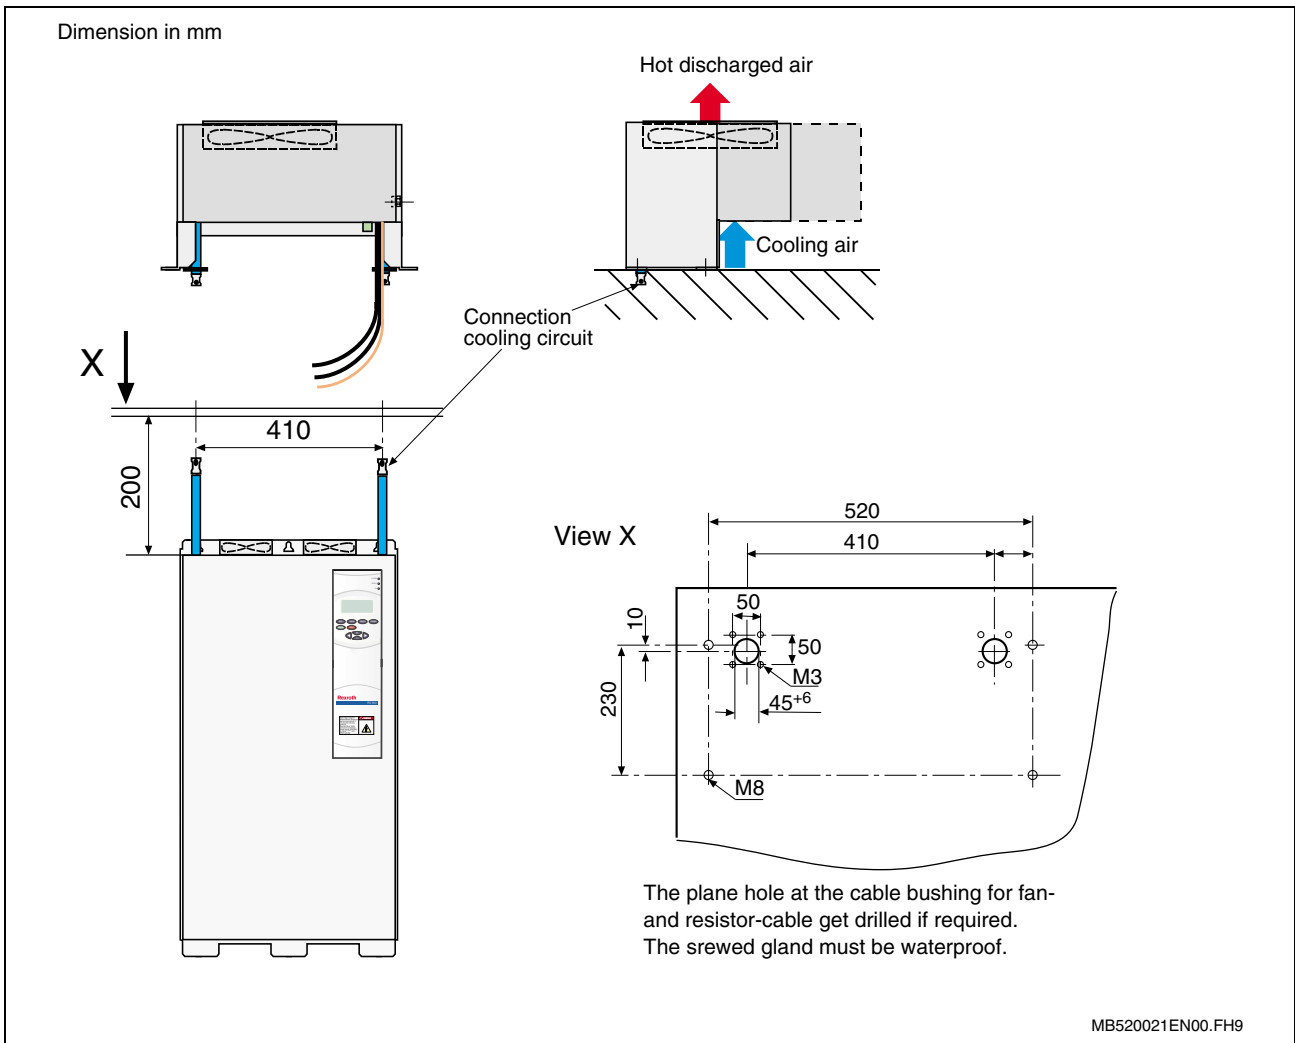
Dimension sheet for cabinet roof mounting, size class G
